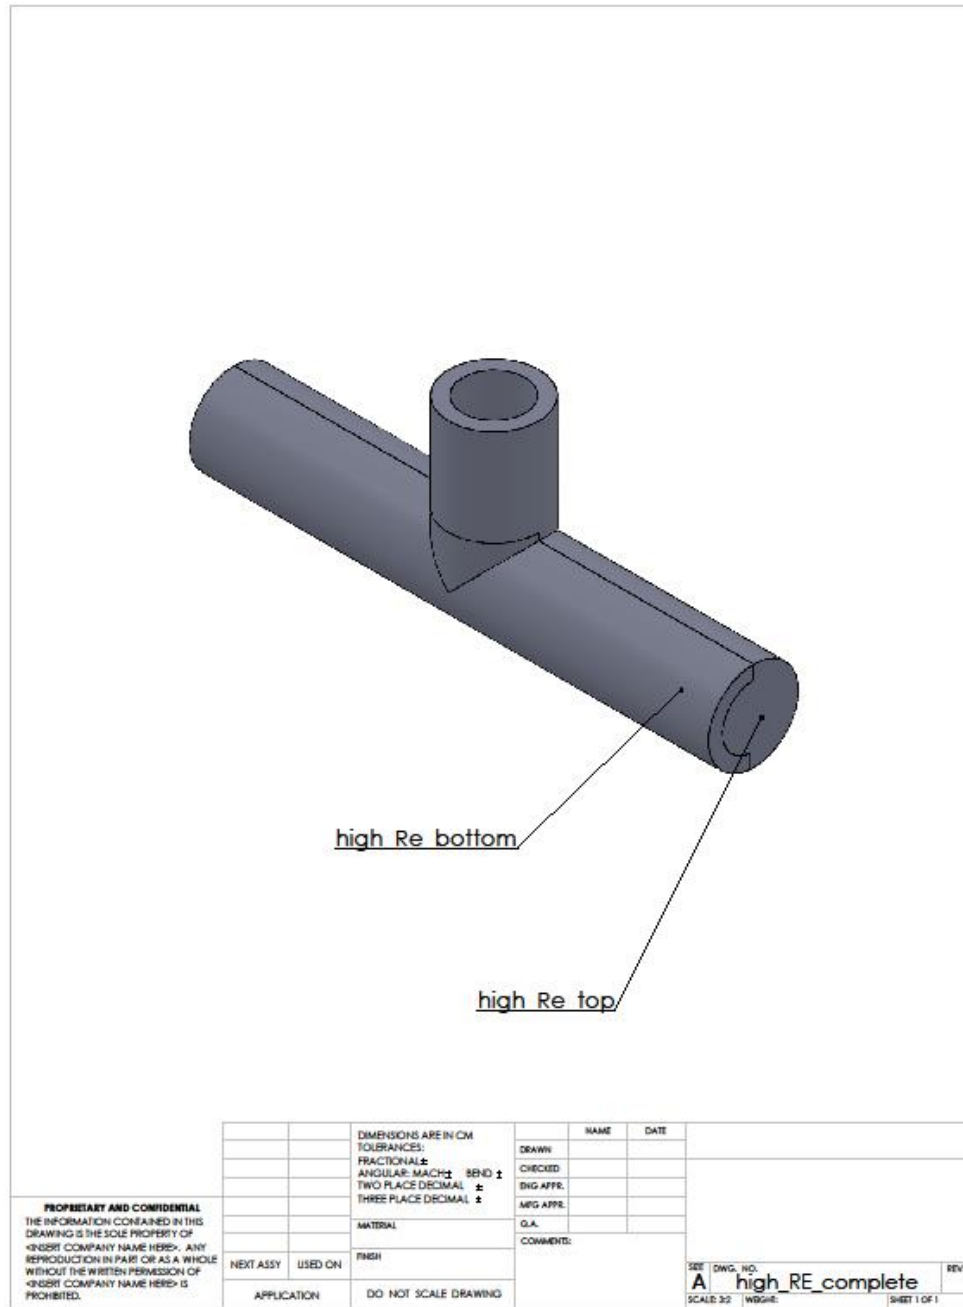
Isometric assembly drawing of the order-100-*Re* line source containing identification of the individual parts.
